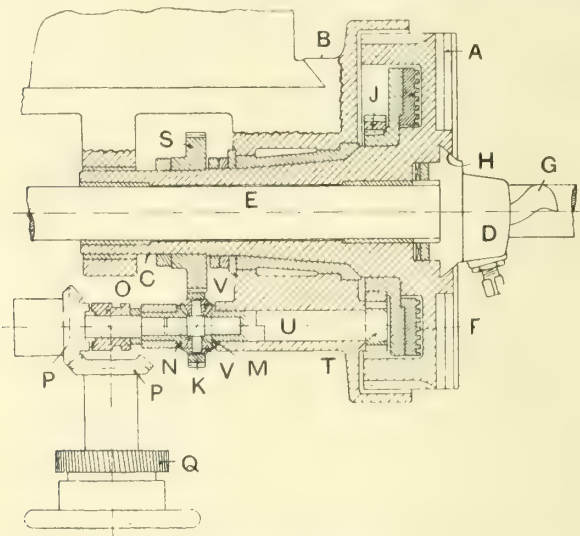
IMPROVEMENTS IN BORING AND FACING MACHINES.
